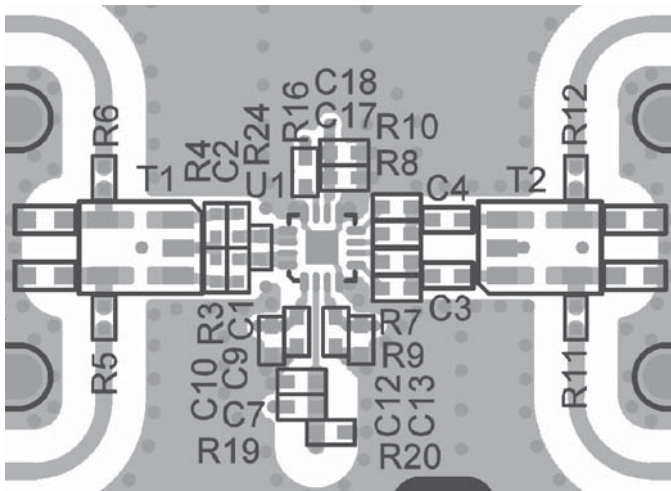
DC987B Demo Board Layout, Layer 1.
